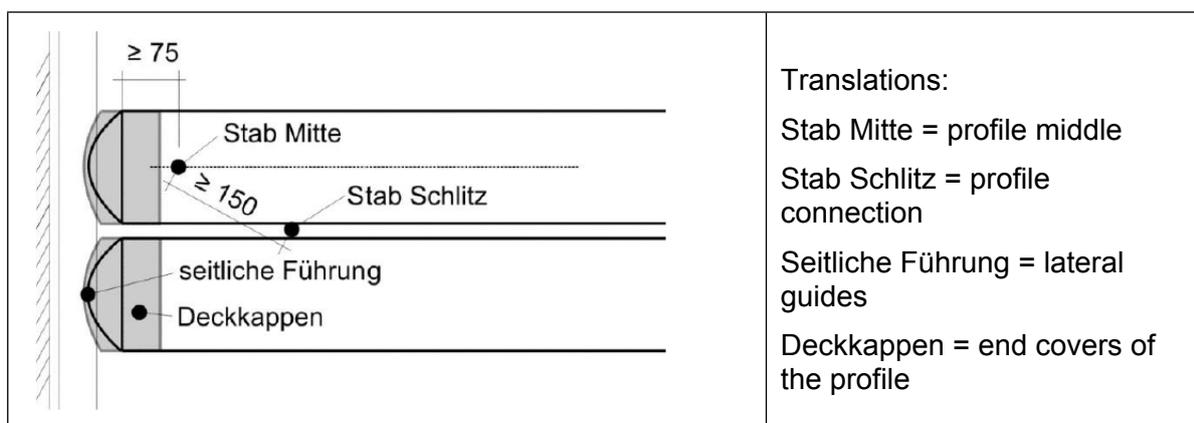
Outline of target locations on the pool cover specimen (dimensions in millimetres)
